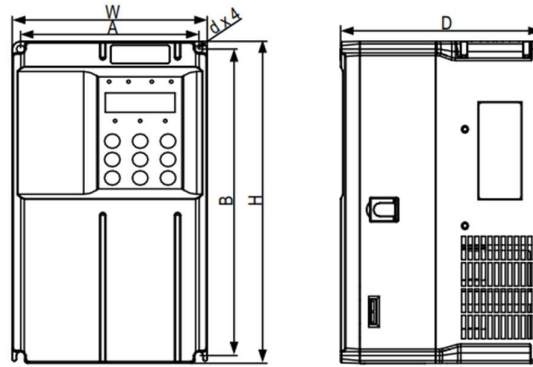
External dimensions and mounting dimensions of T1 to T4 frames models.
